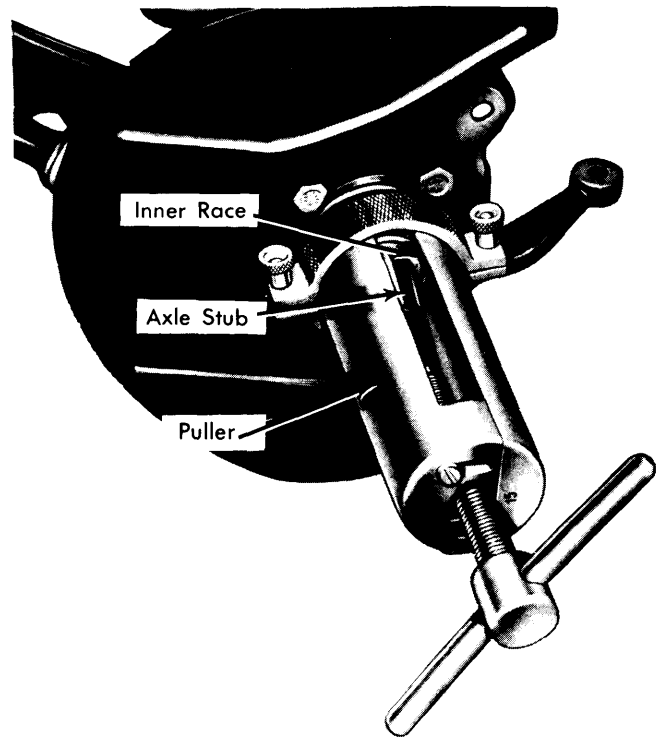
Removing Inner Race of Inside Front Wheel Bearing
